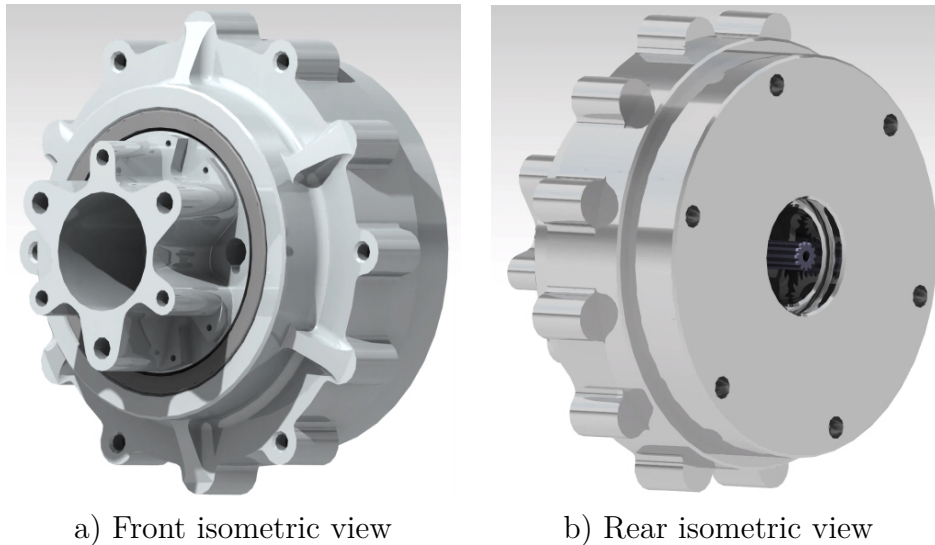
3D-model of the final gearbox in CATIA V5
